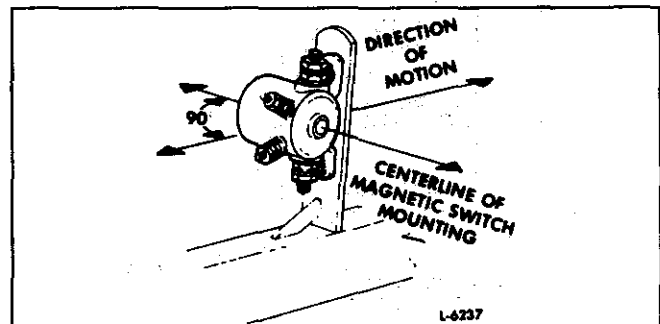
Starter Auxiliary Magnetic Switch Mounting
